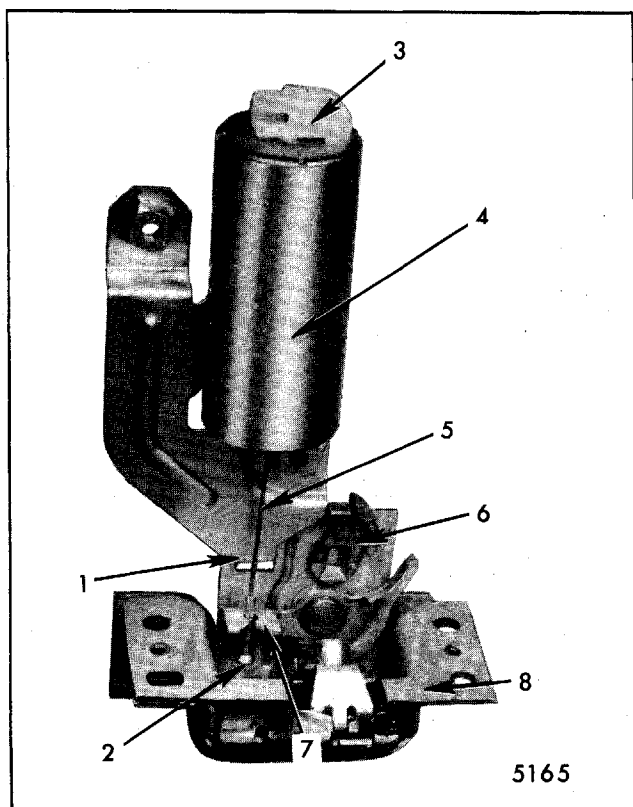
Tailgate Lock and Lock Release Solenoid
